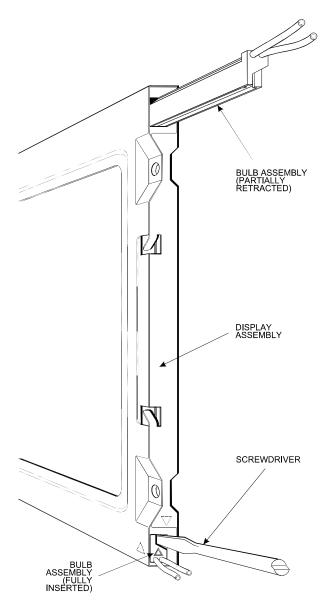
Model #LQ10D421 Bulb Assembly Removal
